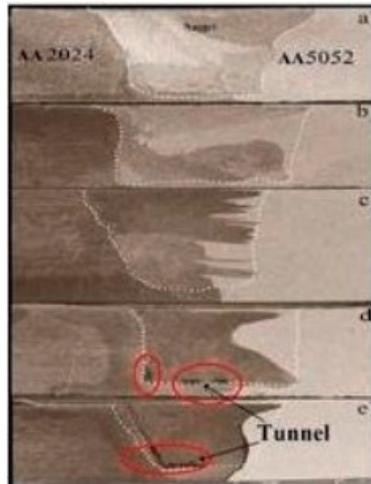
Cross sectional macrostructures of welded samples.
